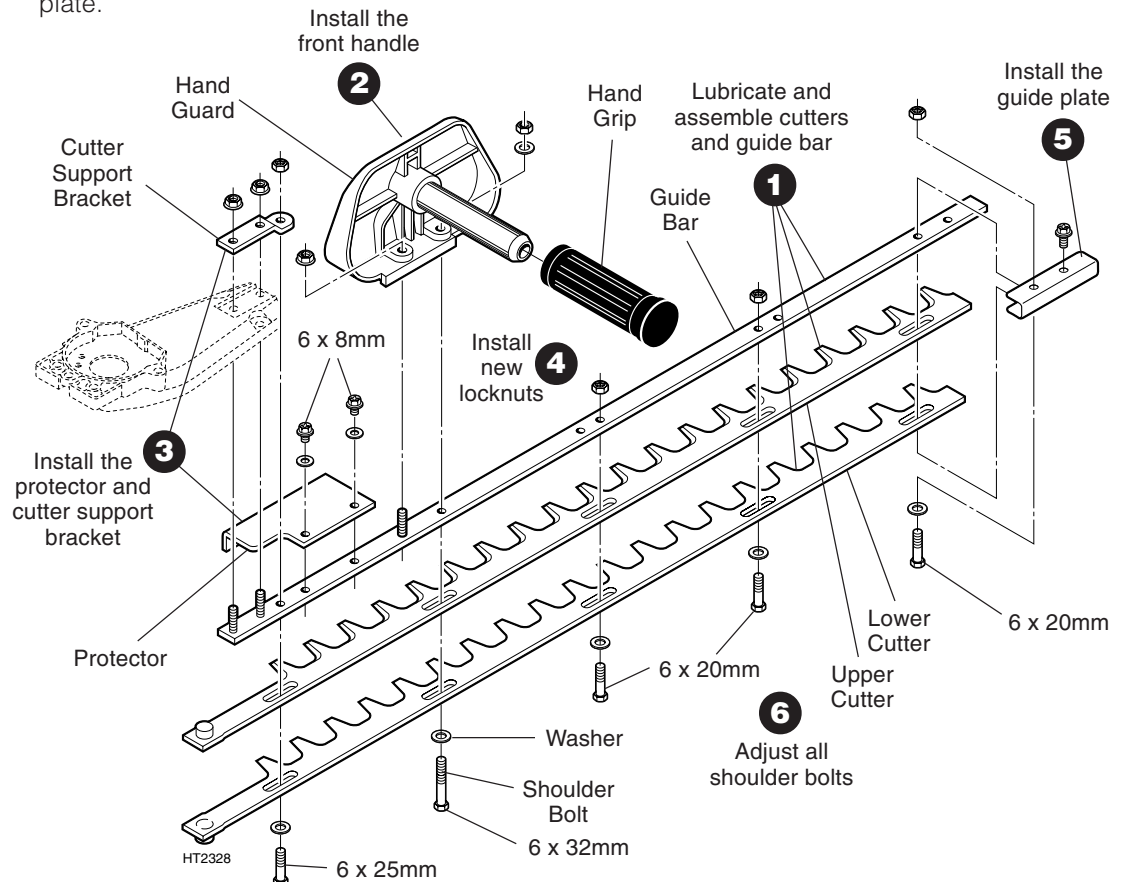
Reassembling the HT230 Cutter and Guide Bar.
